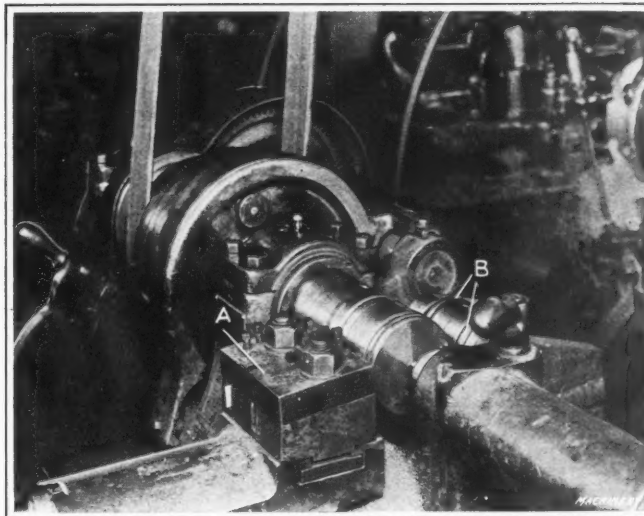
Cincinnati Lathe & Tool Co.'s 16-inch Engine Lathe tooled up for turning and burnishing Ring Grooves in Pistons
